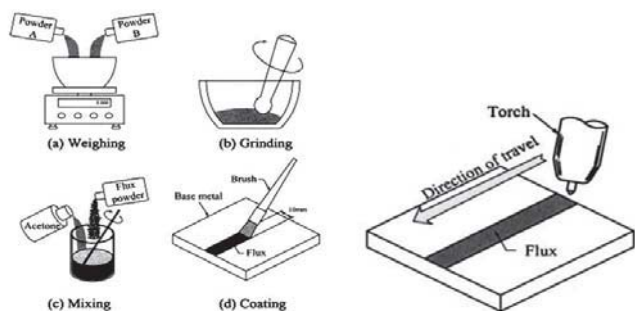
Schematic diagram of A-TIG welding [8].
